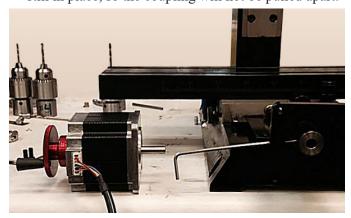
Shows the 3/32" Allen wrench still engaged with the CNC coupling.
